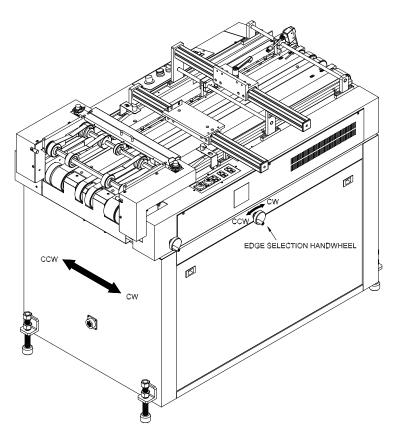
Rear of BK730-2 showing the edge selection handwheel
